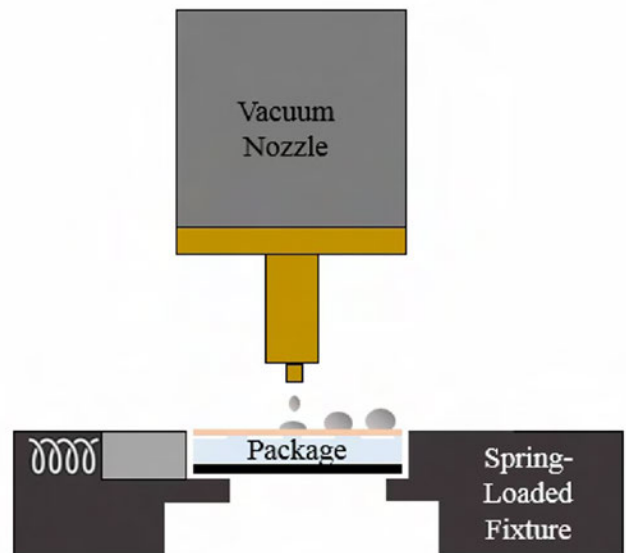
Schematic demonstrating the tool set-up for vacuum scavenging a WLP.
